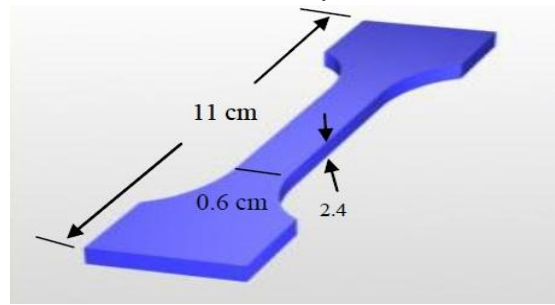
Shows the tensile specimen coupon dimensions centimeters
